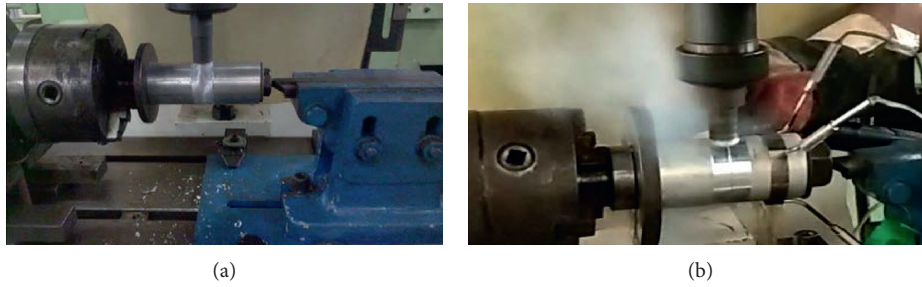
(a) Dry. (b) Cryogenic- (LN₂-) assisted friction stir welding operation.
